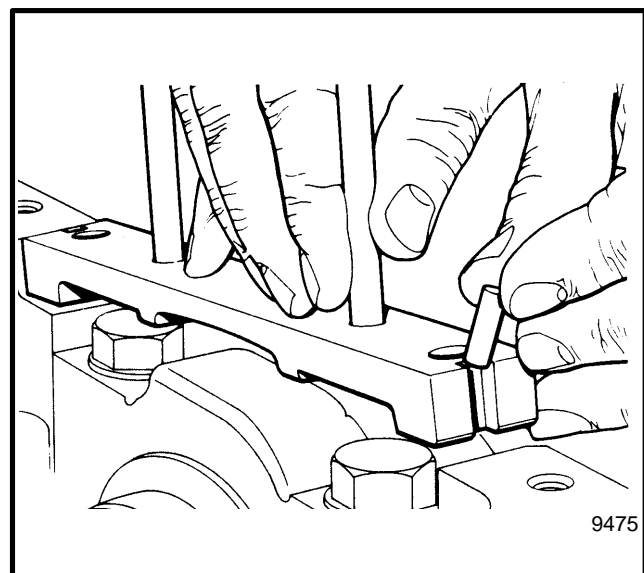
MAKE SURE SUPPORT IS EVEN WITH CRANKCASE
